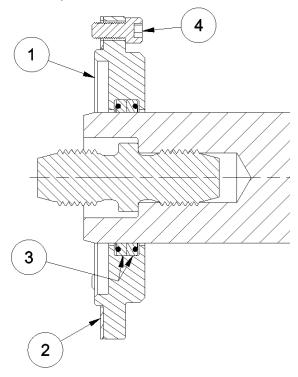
FLUID END ASSEMBLY 3.5" - 4.5" SECTION A-A
